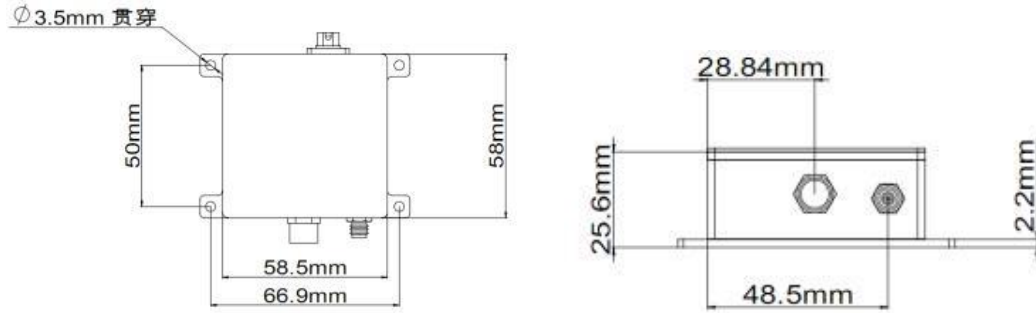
Mechanical Dimension Drawing of APD Detector Module
